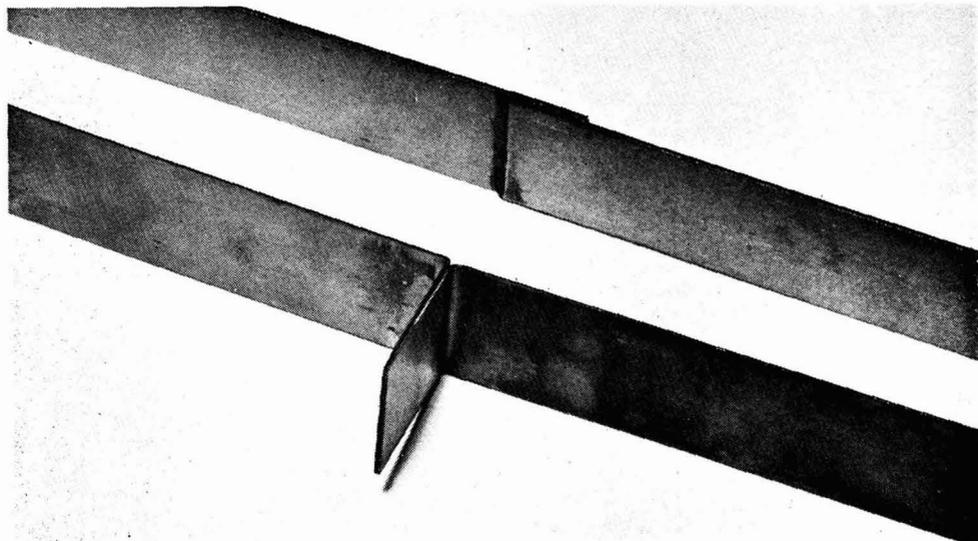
Examples of adhesive test specimens: lap shear (upper), cleavage (lower)
